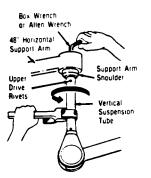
UPPER DRIVE RIVET INSPECTION.
